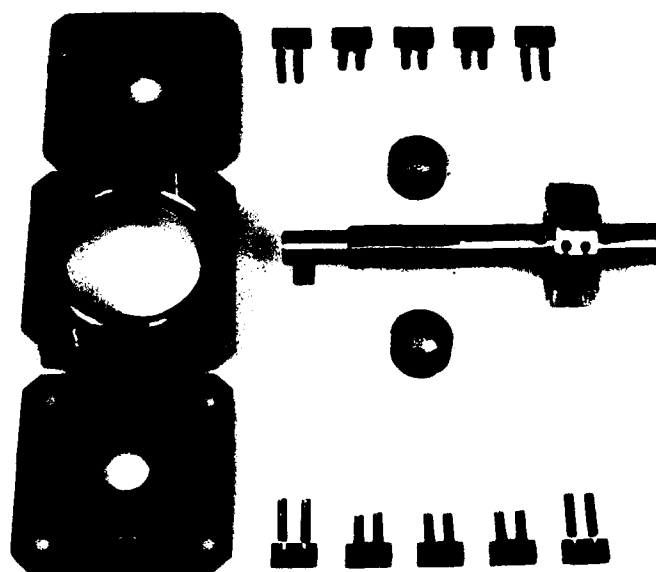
Disassembled vane motor showing high wear components: vane, rotor, track, flexible side wear plates, and vane springs.
